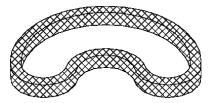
Bending of the step seal to facilitate fitting in the packing house.
